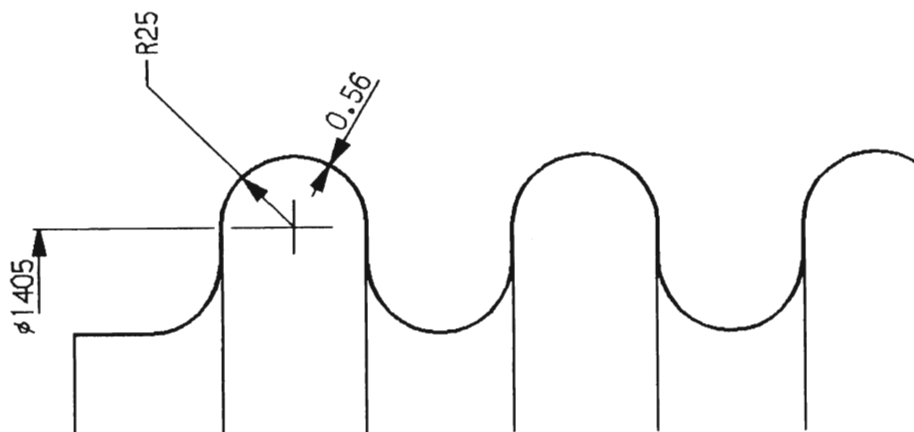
Cross section of proposed corrugated tube wall. (All dimensions in mm)
